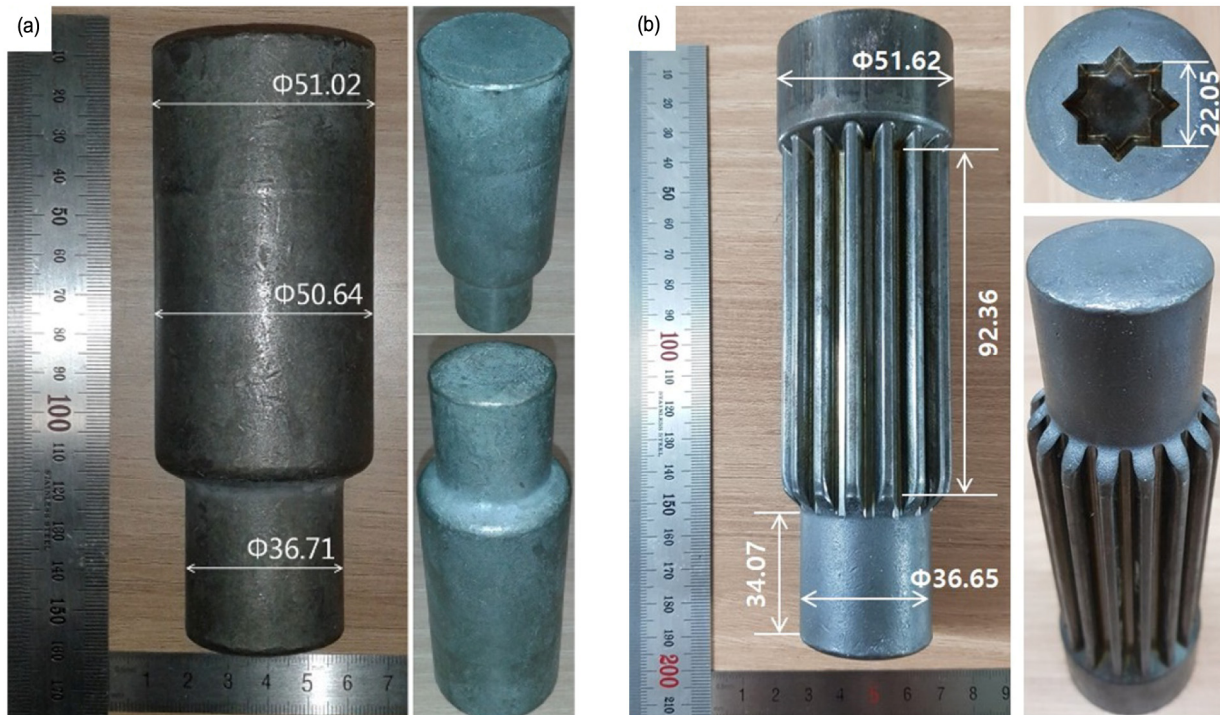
Cold forged prototypes (unit : mm): (a) preform by forward extrusion; (b) drive shaft by combined extrusion.
